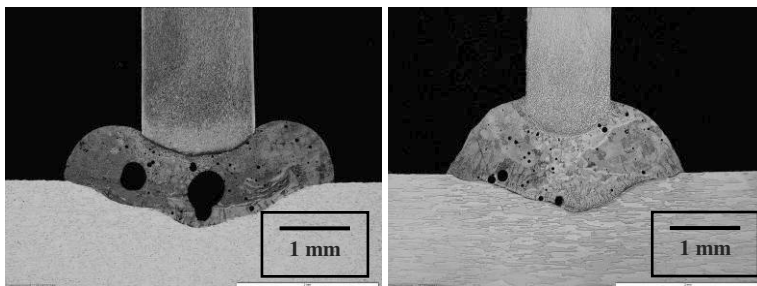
Micrograph of welding different materials, 2198 Stringer and 6xxx skin (left), 2198 Stringer with removed surface layer and 2198 skin (right)
